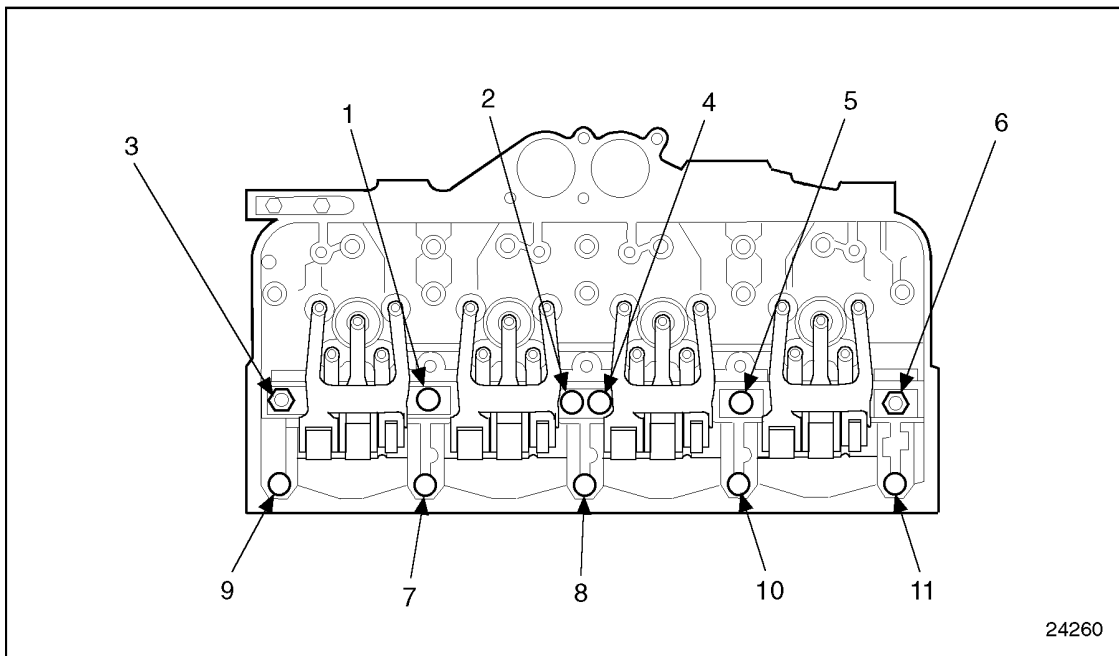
Camshaft Cap and Rocker Arm Shaft Bolt and Nut Torque Sequence
